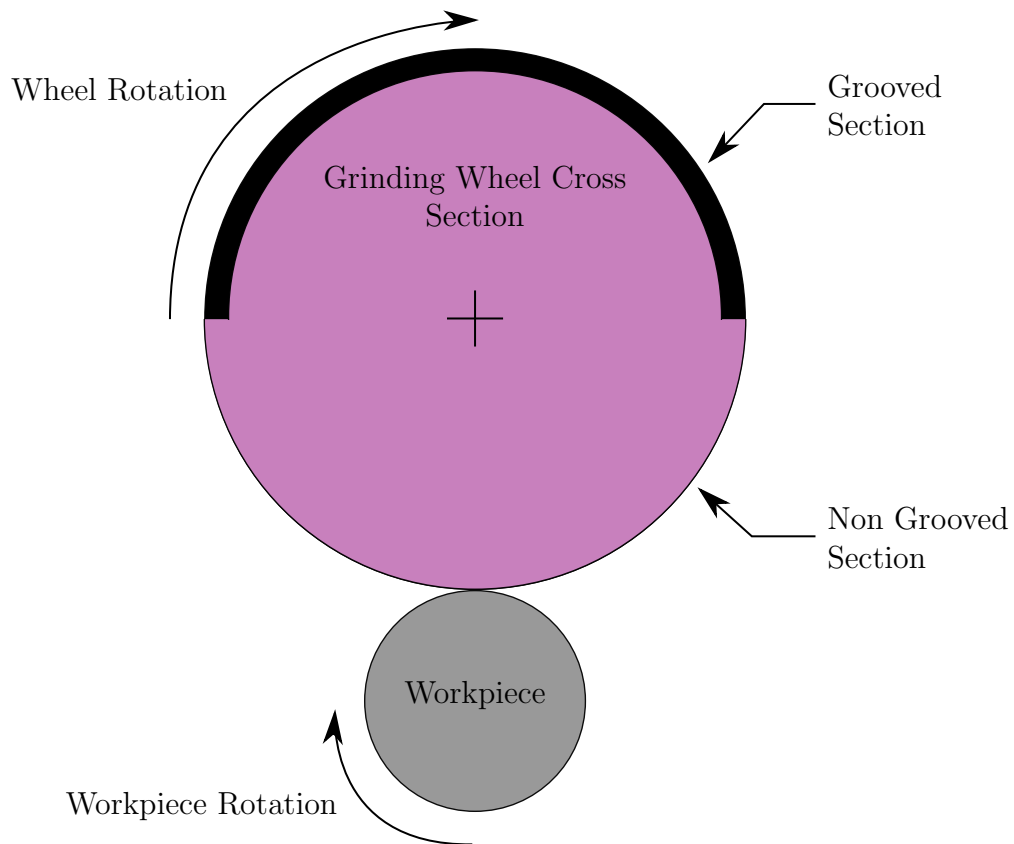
The cross section of  $\eta = 50\%$  circumferentially grooved wheel in contact with a workpiece
